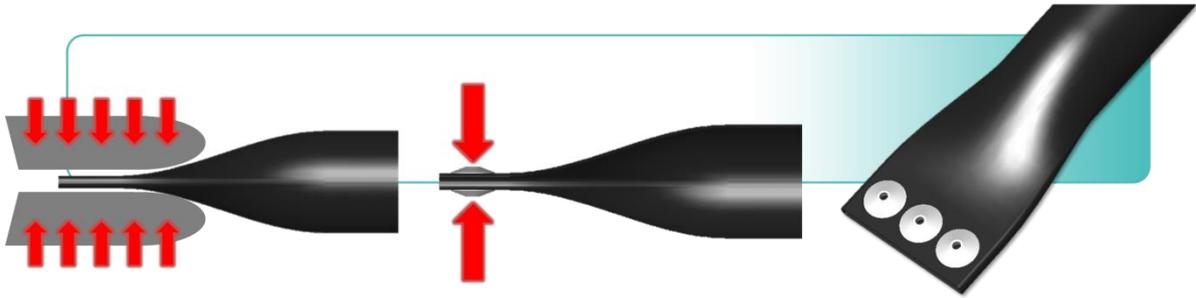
swaged metallic/ thermoformed CFC joint, courtesy of ILK TU
